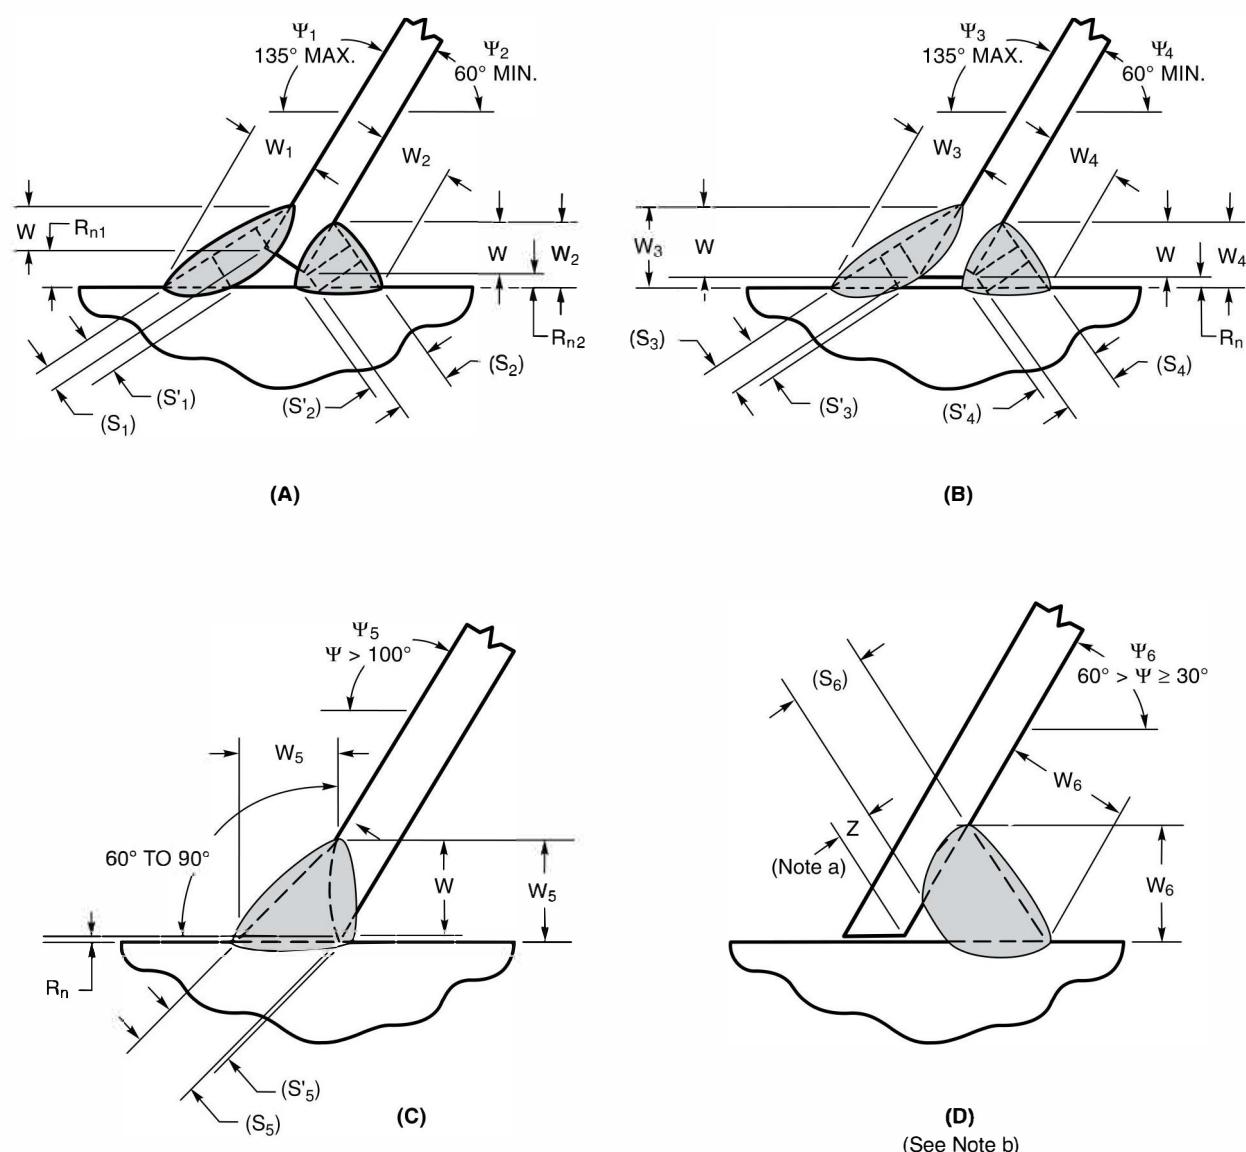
Prequalified Fillet Weld Joint Details (Dimensions in Inches) (See 5.4.3)
